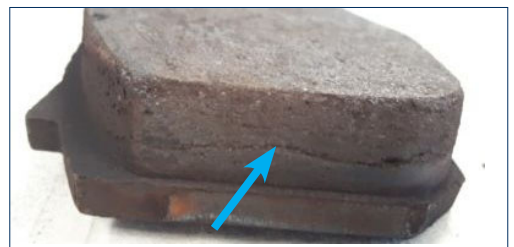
, 6: Cracks running parallel to the backing plate are inadmissible
